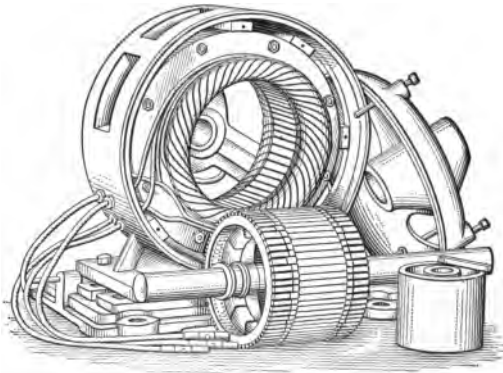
INDUCTION MOTOR WITH "SQUIRREL CAGE" ROTOR.
